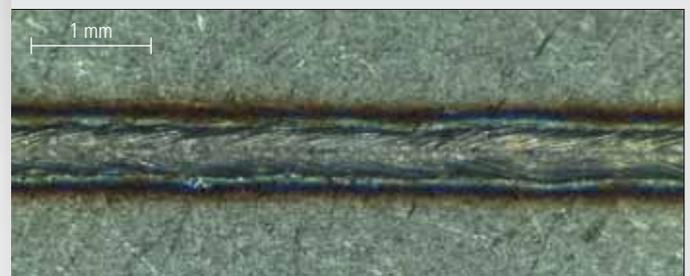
As welded surface of low temperature carburized stainless steel; massively lowered corrosion resistance mainly due to heat tint.
